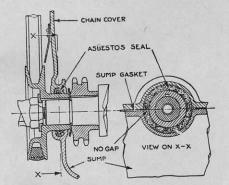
The correct fitting of the seal and sump gasket (front end).
